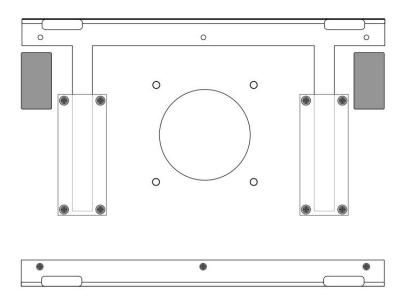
Hole cut in panel for cooling fan, fan mount screws.
